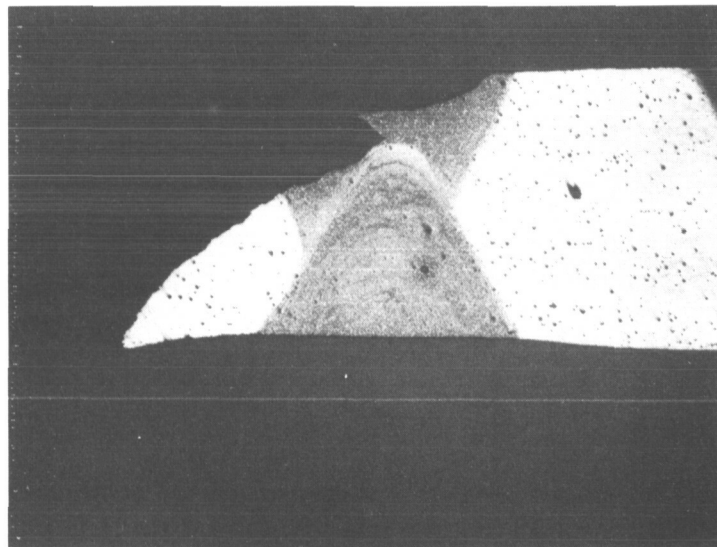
Radiographs of electron beam welded AZ31 magnesium test plates.
